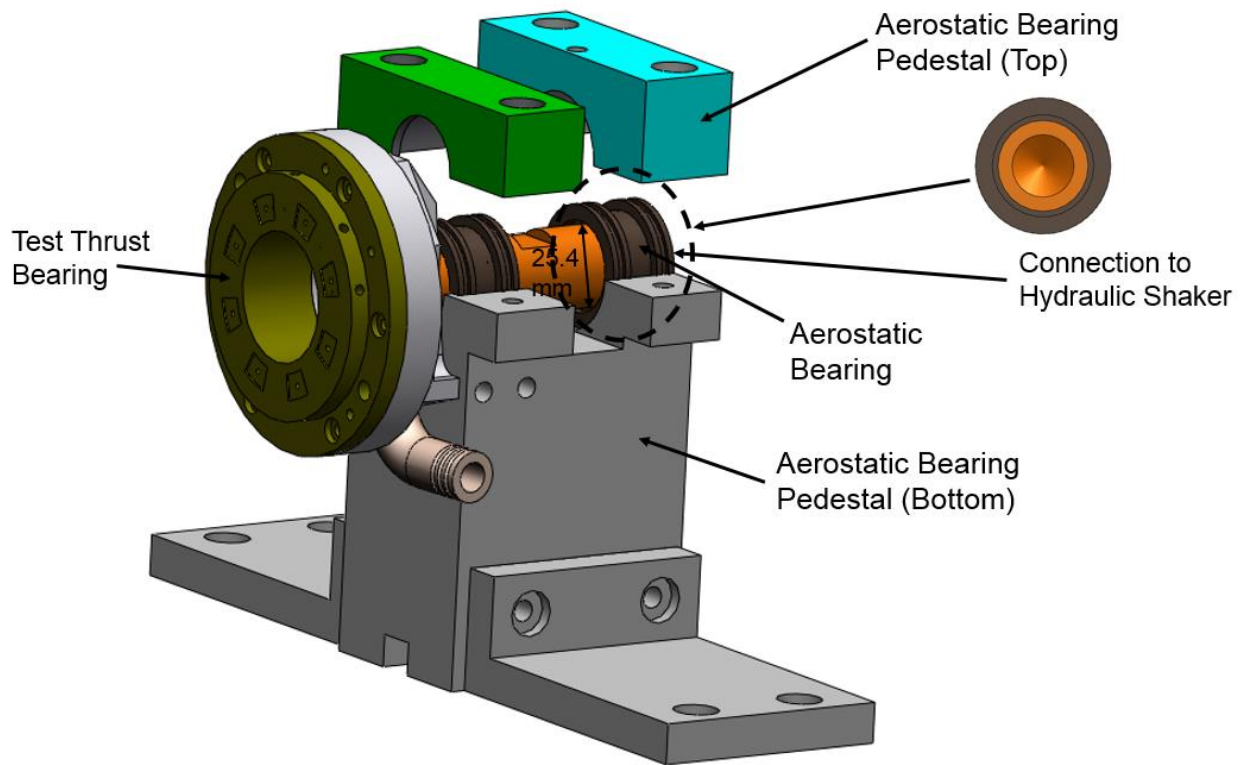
Assembly of test thrust bearing, load shaft, and aerostatic bearings in bearing pedestal.
